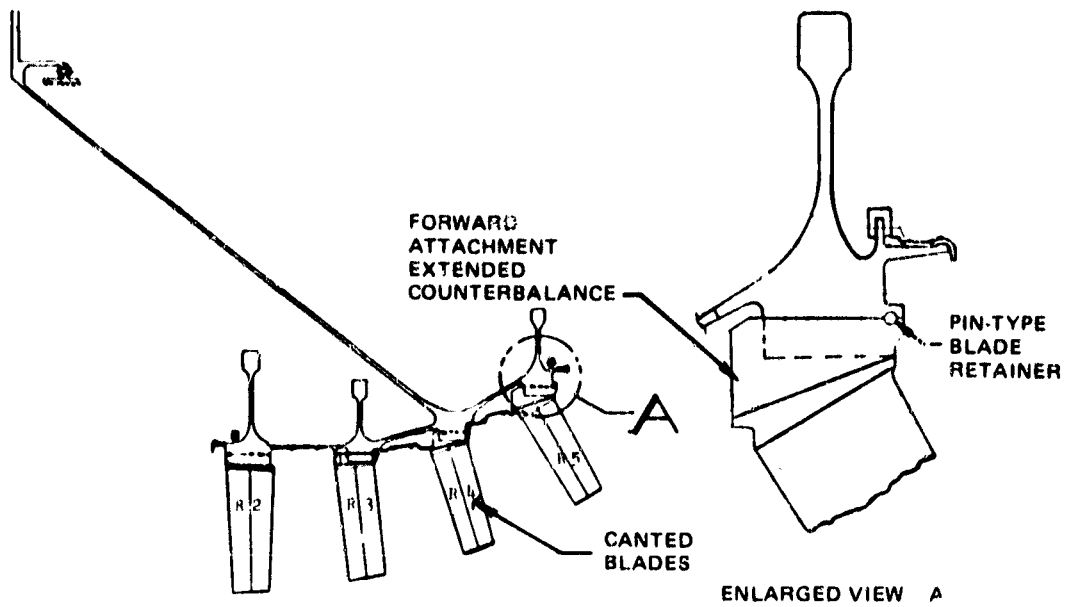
Canted Blade Axial Dovetail Attachment. Enlarged cross-section view shows centrifugally induced bending moment
